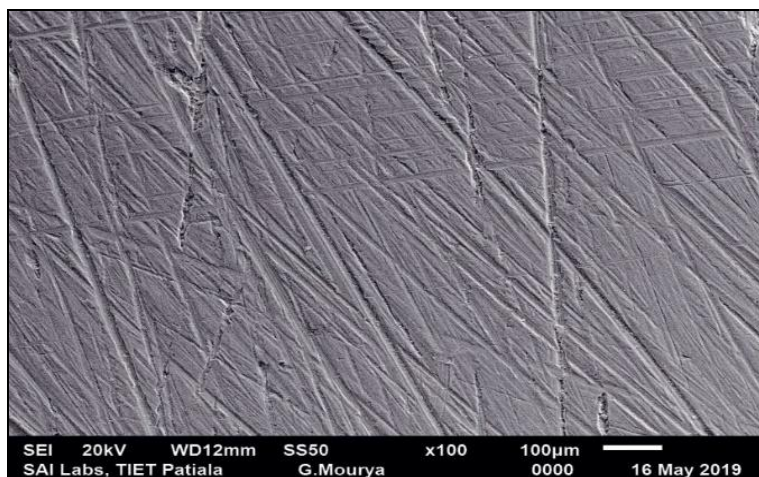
SEM micrograph of workpiece before finishing at 100X, showing deep boring tool marks.
